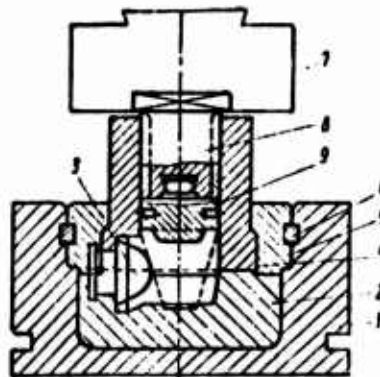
Closed die with split matrix for stamping on a hydraulic press: 1 - body; 2 - lower matrix; 3 - lateral punches; 4 - upper matrix; 5 - clamp plate; 6 - wedges; 7 - shank; 8 - holder; 9 - punch.
